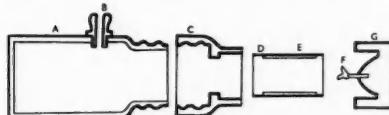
Exploded cross sectional diagram of modified apparatus. A, Glass bottle; B, Connector for tube from pump; C, Moulded rubber connector; D, Inlay ring; E, Asbestos liner; F, Sprued inlay pattern; G, Moulded rubber sprue base.
